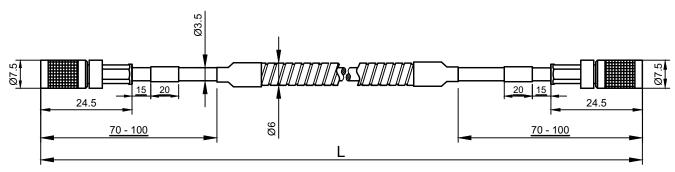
Dimensions of connection cable ds82x.ec302 (steel protection) mechanical reinforcement
